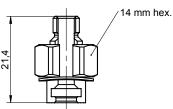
Removal tool, Type 6419A21B on mounting nut Type 6419A21A
